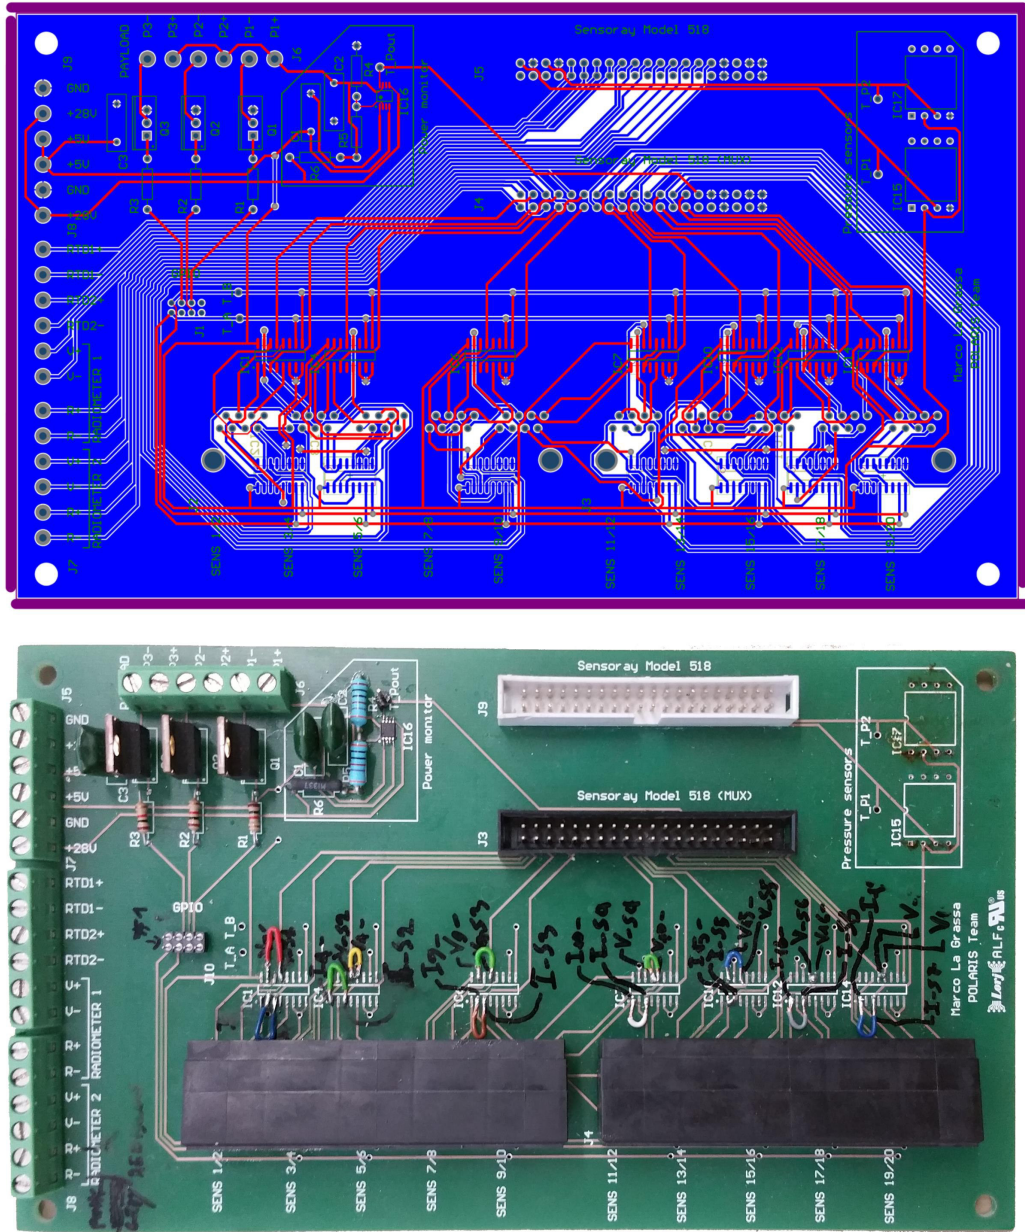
Sensor Acquisition PCB Spare component and its schematic
